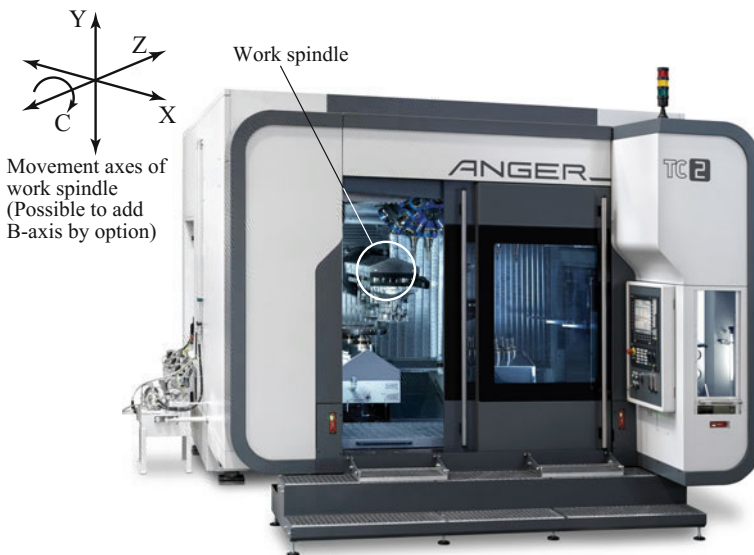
Appearance and machining space of “*Transfer Center*” (by courtesy of Anger 2014)
